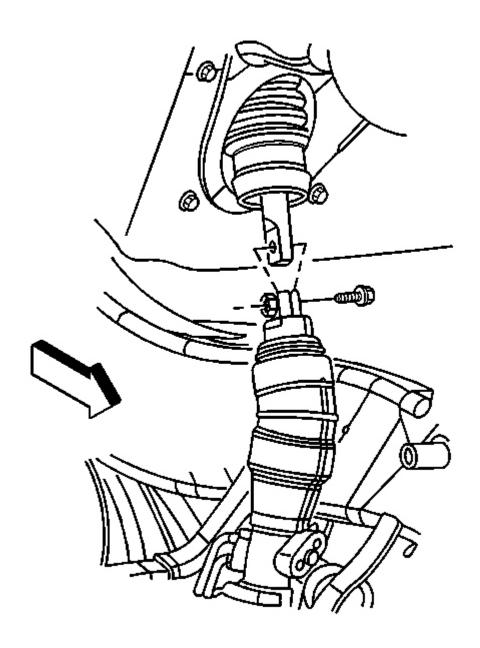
View Of Intermediate Shaft Boot Courtesy of GENERAL MOTORS CORP.
